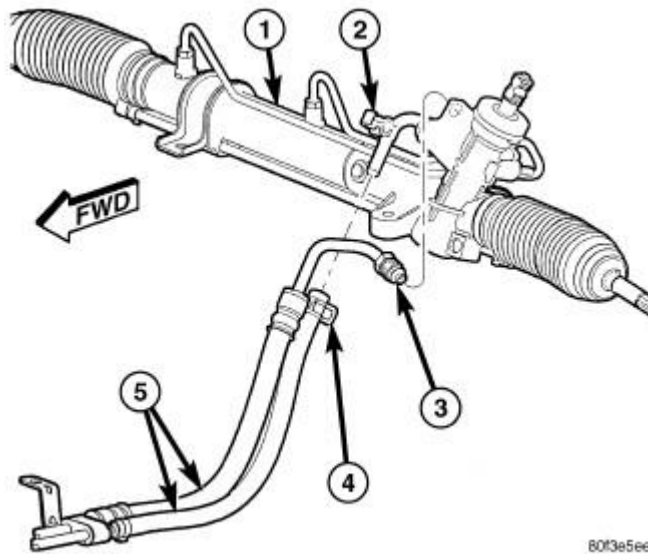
Hoses At Power Steering Gear - 2.4L Turbo
